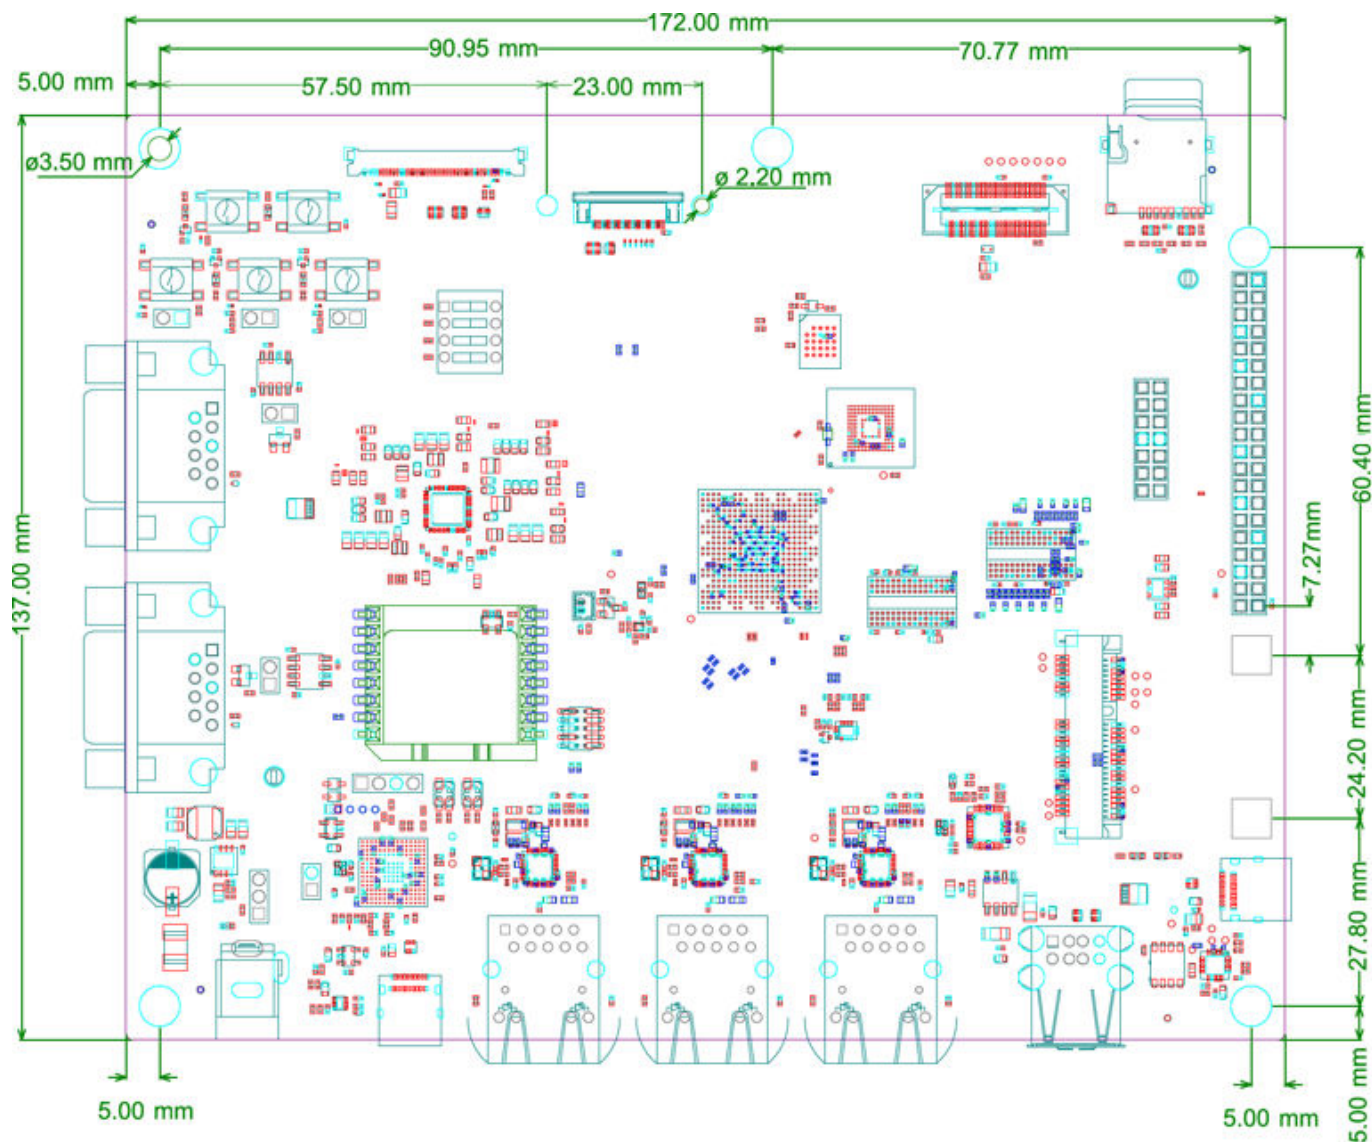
STM32MP257F-EV1 PCB layout (bottom side)
